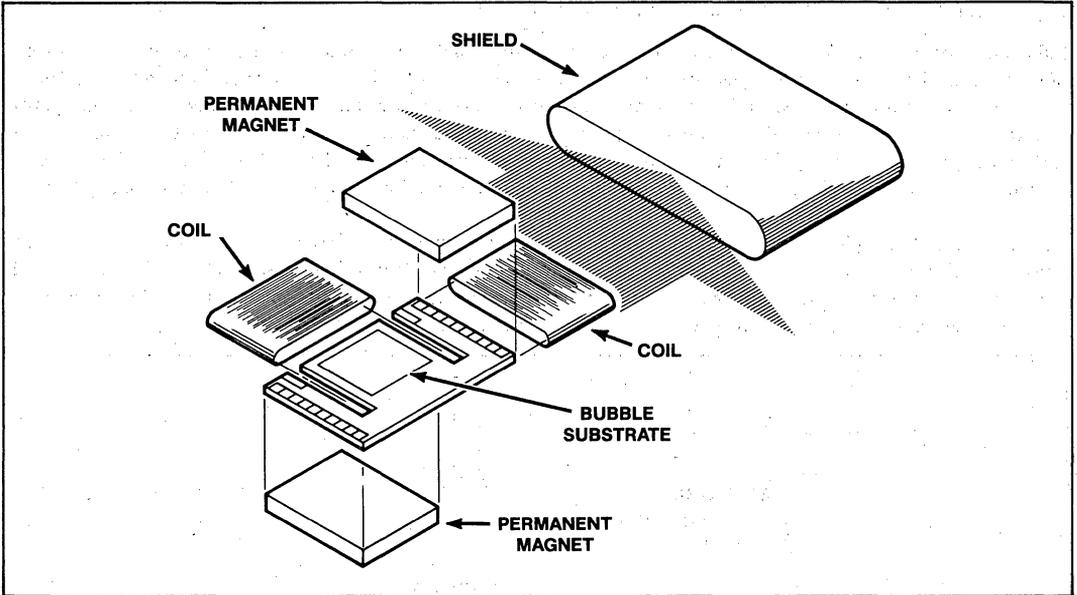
Magnetic Bubble Unit Assembly—Exploded View
